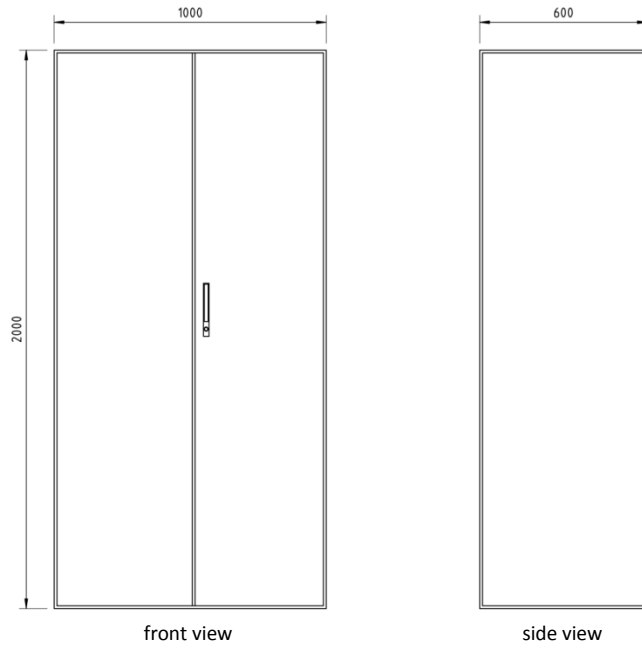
Current injection dimension drawing in control cabinet for outdoor installation
